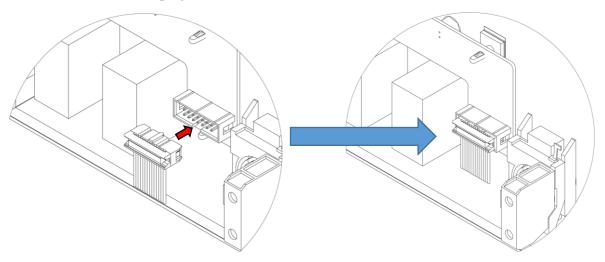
Attaching the Ribbon Cable from the LA Daughterboard to the LA Motherboard
